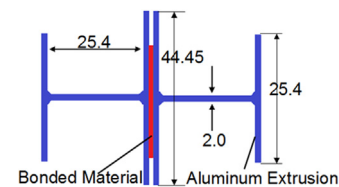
Configuration of specimen and Aluminum extrusion dimensions.
